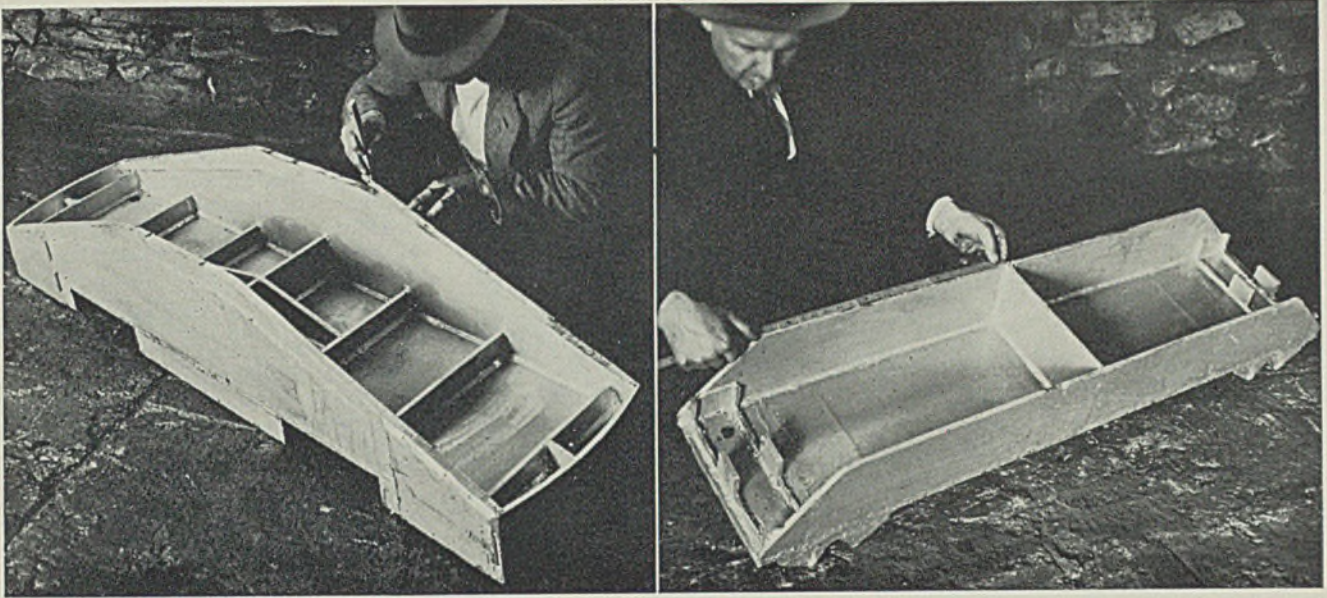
Closeup of truck frame used on the cars, made up of 78 separate pieces and weighing about 1500 pounds before machining
